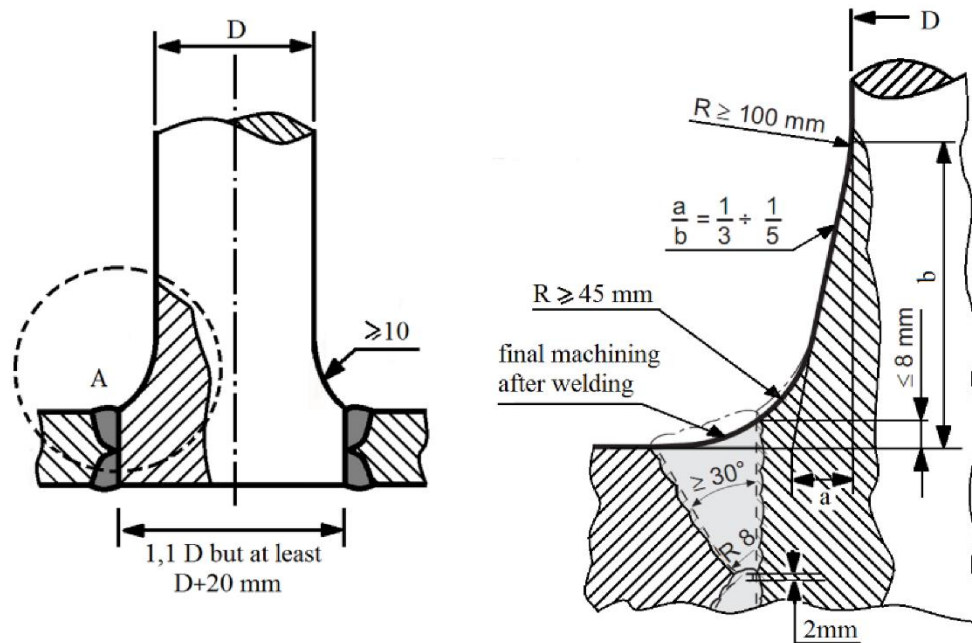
Welded joint between rudder shaft and coupling flange.
